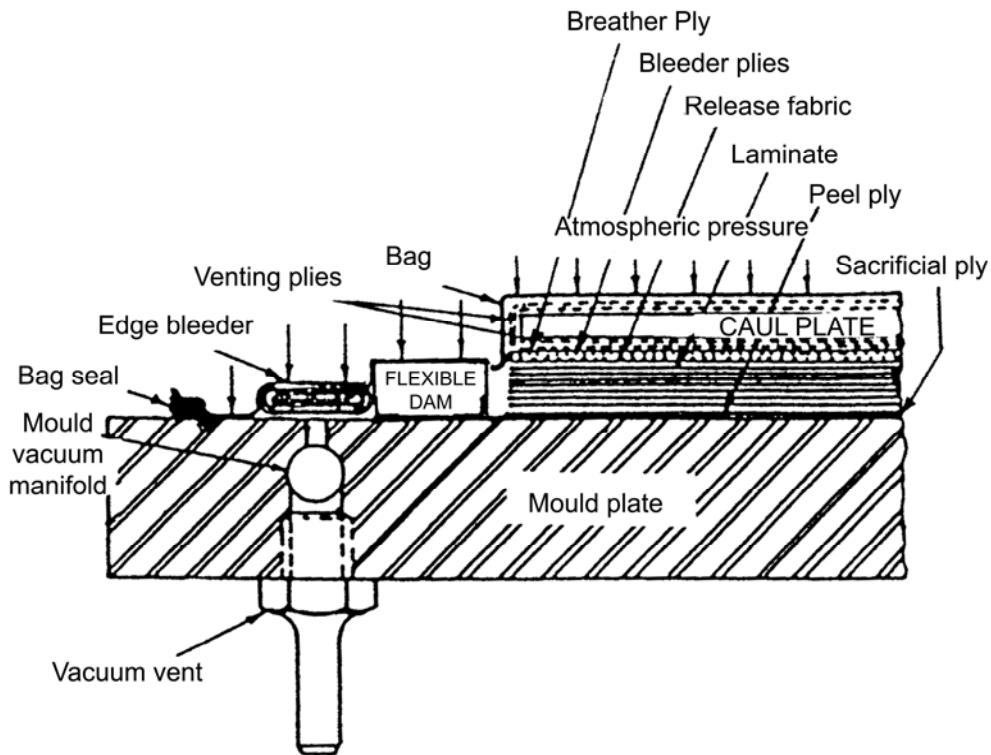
Vacuum bag moulding method, with vertical bleeder
